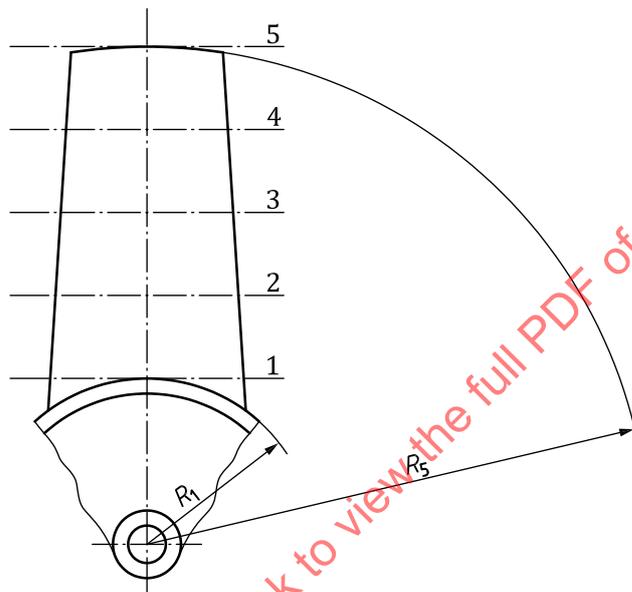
Axial impeller, blade divided into four parts using five sections
